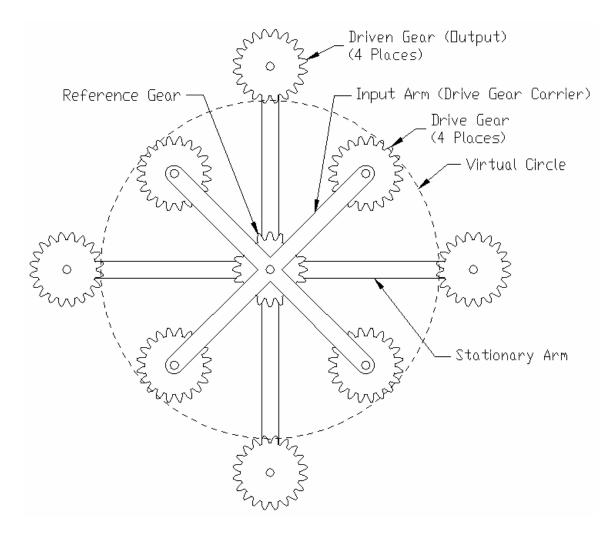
Embodiment 3 with Equal Number of Drive and Driven Gears
